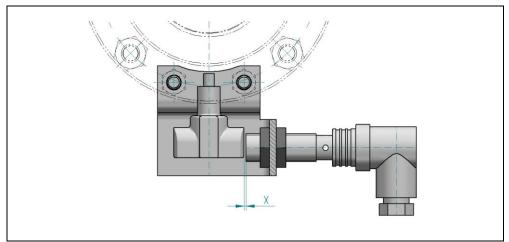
Proximity switch setting dimension $X_{min} = 0.5 \text{mm}$, $X_{max} = 2.5 \text{mm}$
